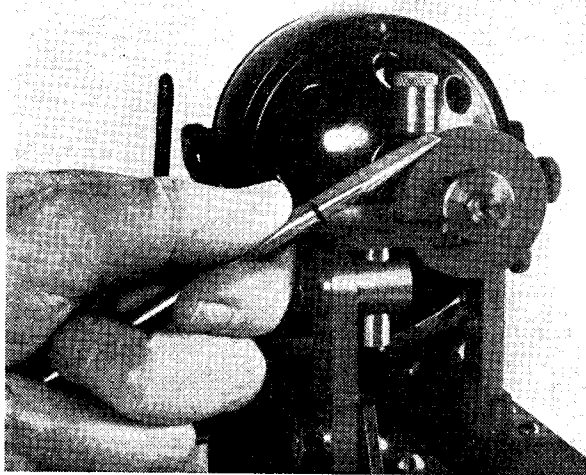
Showing method of applying the screwdriver to the grinding wheel
